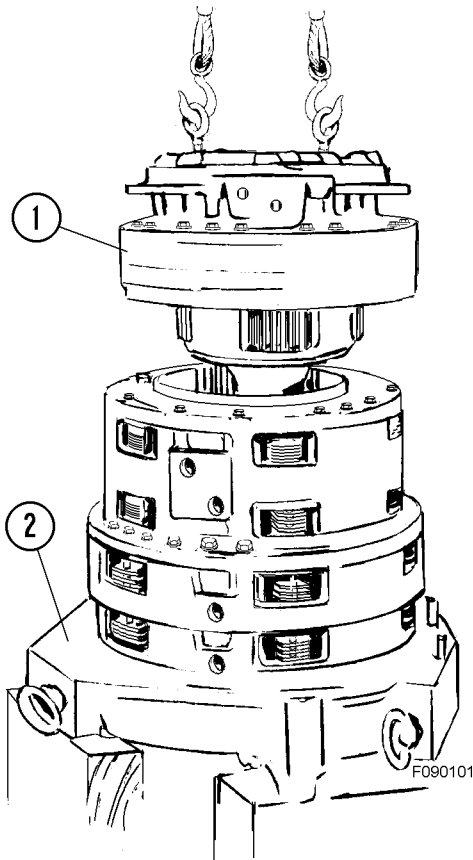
FRONT PLANETARY & CLUTCH INSTALLATION
